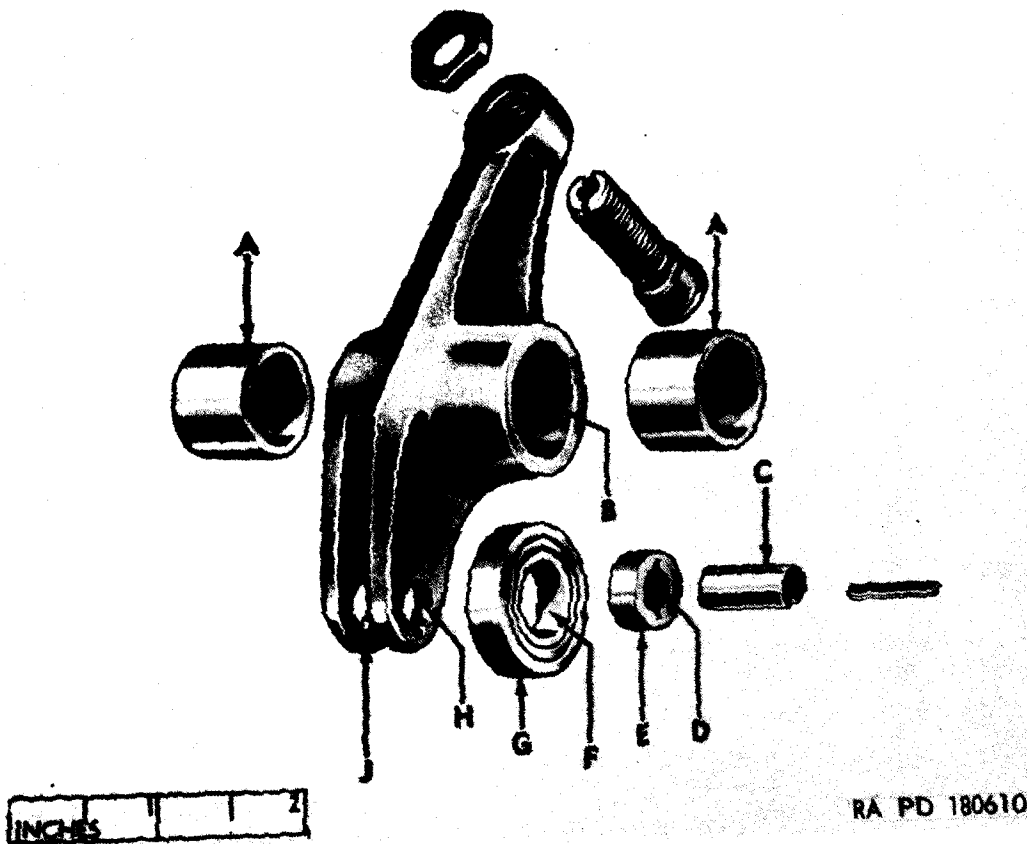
Repair and rebuild standard points of measurement for valve rocker assembly.
